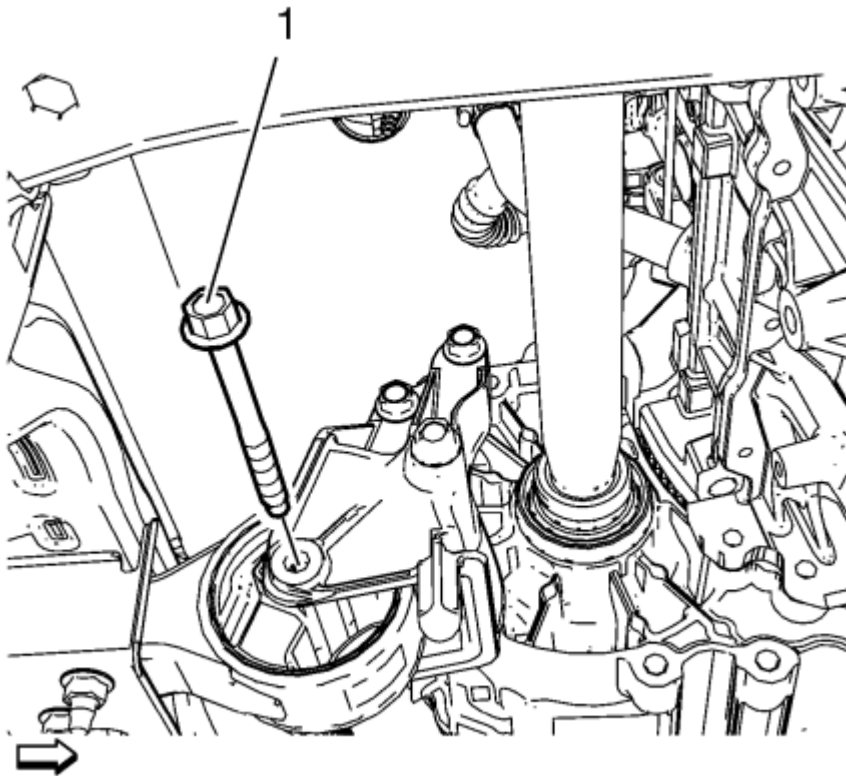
Automatic Transmission Mount Bracket Through Bolt
